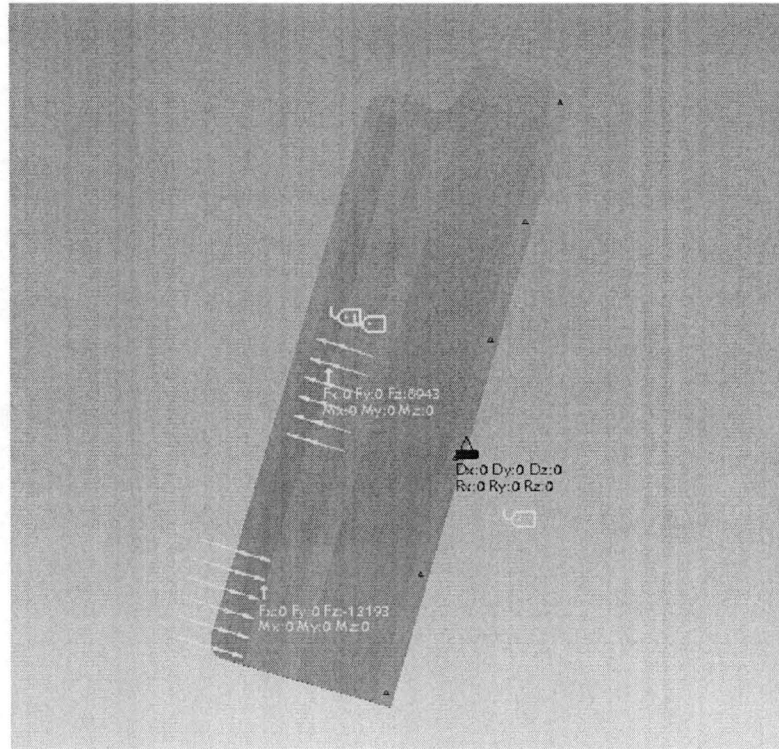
Pro/E Mechanical Back Plate Bending Analysis
